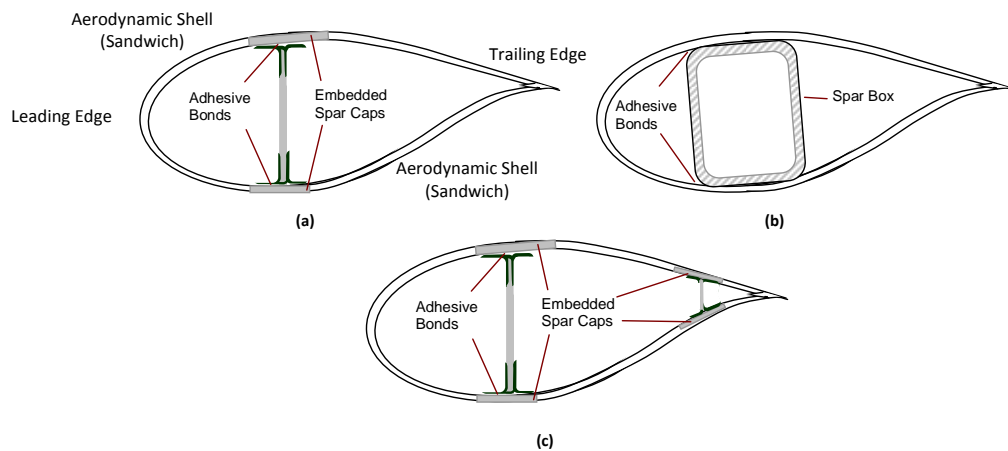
Typical Rotor Blade cross-sections: shear web with embedded spar caps (a); spar box (b); double shear-web design (c).
